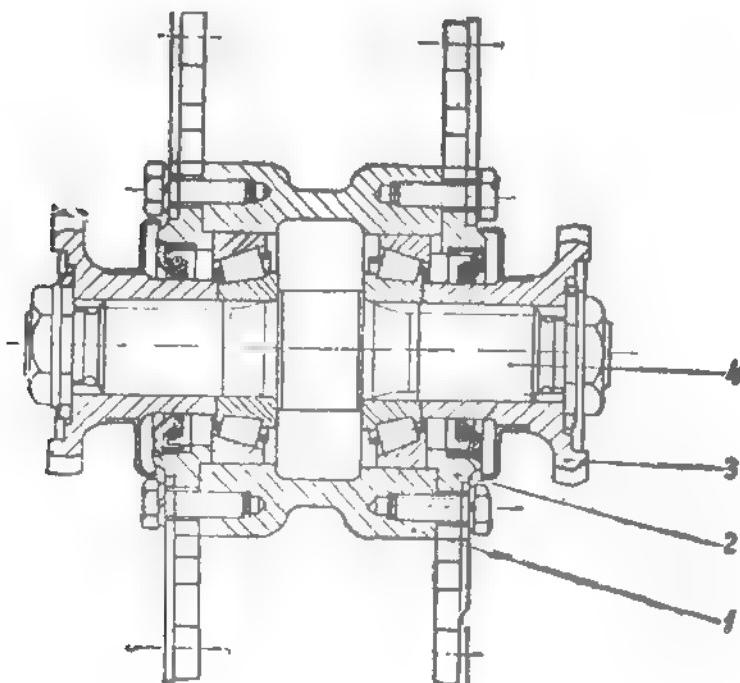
PROPELLER SHAFT MIDDLE BEARING
